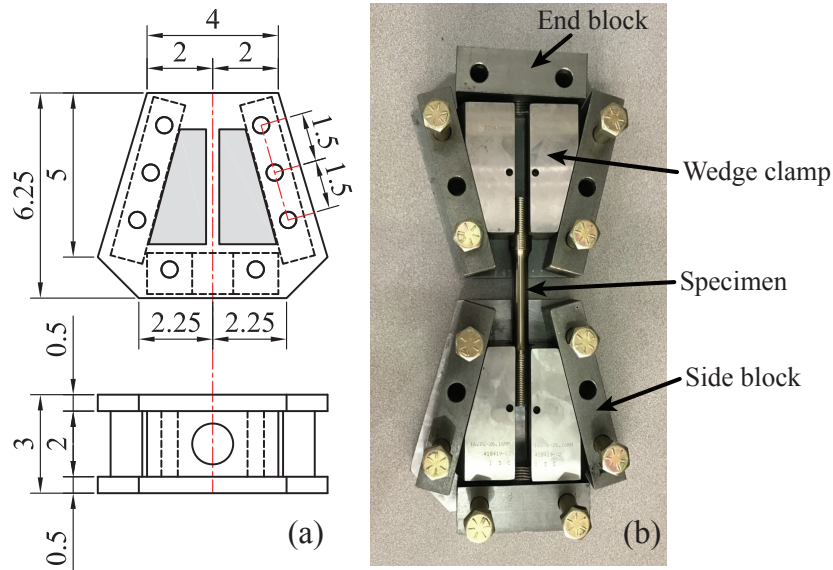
Design of loading grips for SMA Coupon specimens: (a) top and side view and (b) photo of assembly (units: inch).
